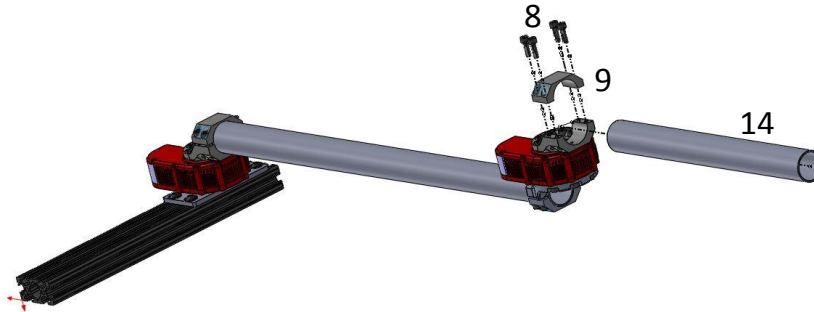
Attaching the Second Link to the Assembly in Fig. 7
